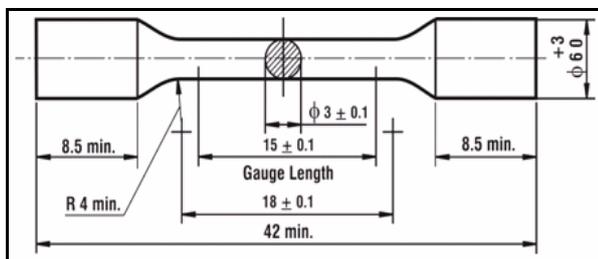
Test specimen was fabricated according to specification of ISO 6871 for dental base metal casting alloys (all dimensions are in mm)
